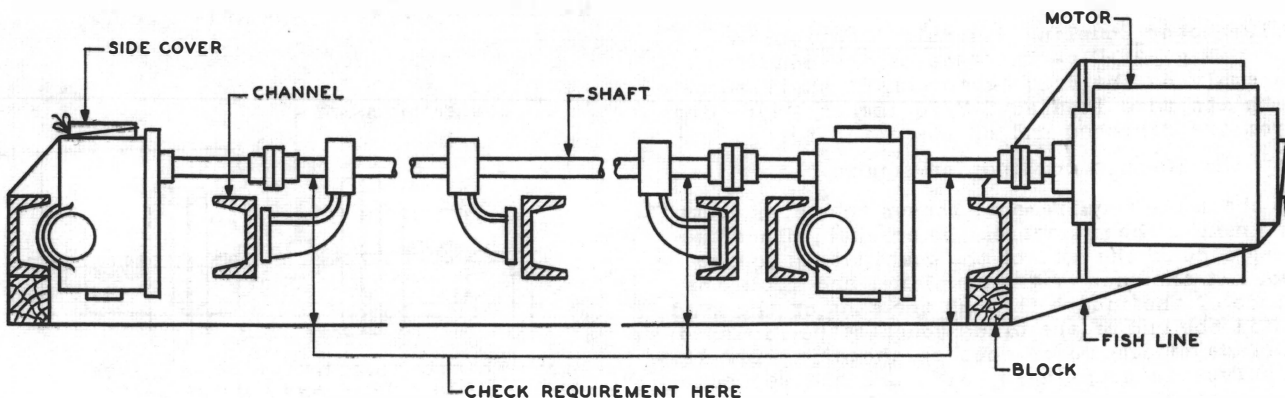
Method of Checking Alignment of Shaft Connected Drives
